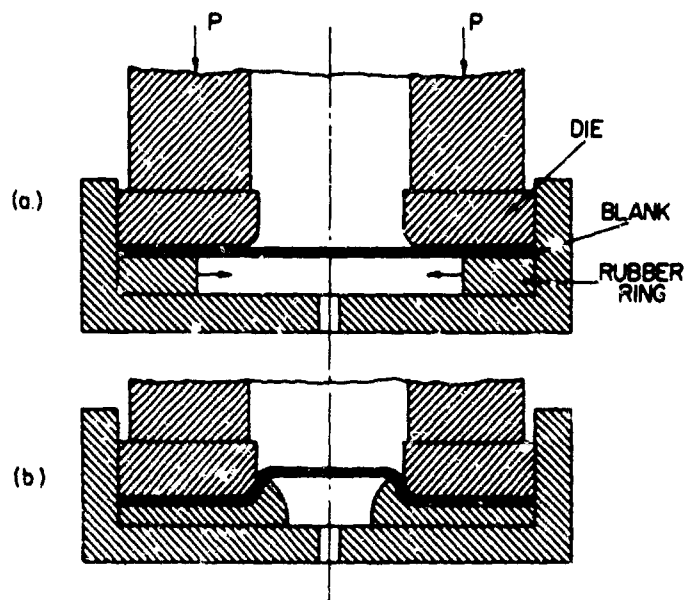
Sketch of a deep drawing method in which a rubber ring replaces the punch. (a) Die assembly showing blank in position; (b) with pressure applied, rubber ring is forced in towards the die orifice [56].
